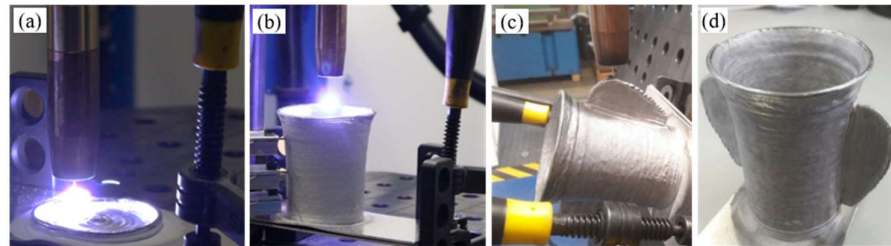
Building overhanging features: (a) building the bottom; (b) building the cylinder; (c) building the handles; (d) finished part
